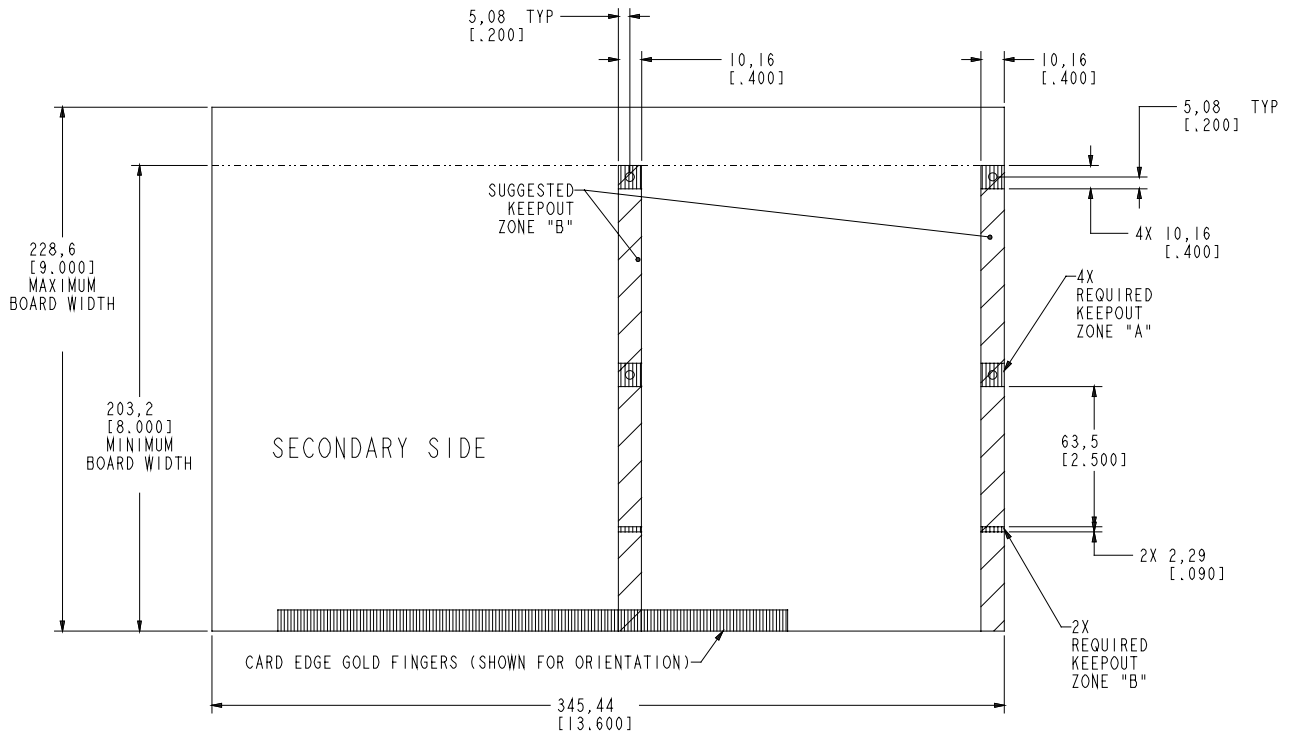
NLX Motherboard Dimensions—13.6" Secondary Side
